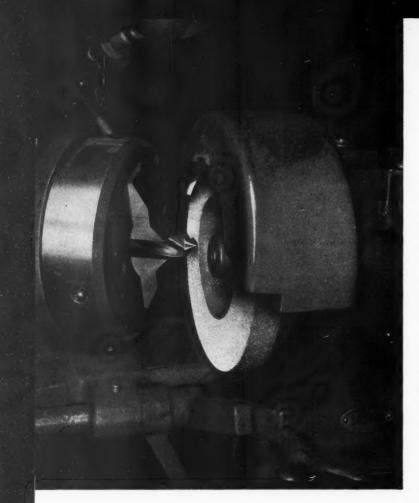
Close-up view of the drill sharpening machine seen in Fig. 7, showing how the drill is held in a twojaw, self-centering chuck. Drills from 1/4 inch to 3 inches in diameter can be ground on this machine
